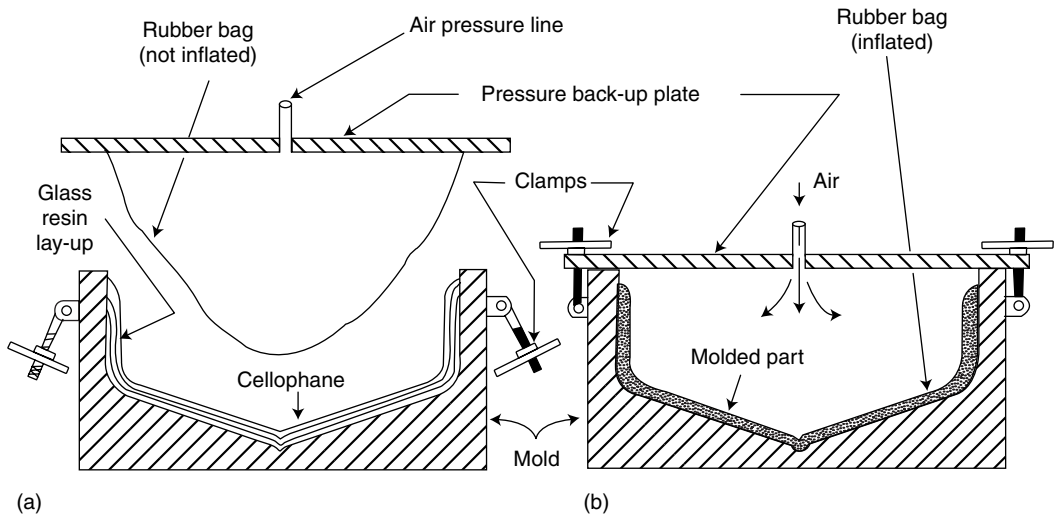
Pressure-bag molding: (a) during lay-up; (b) during curing.
